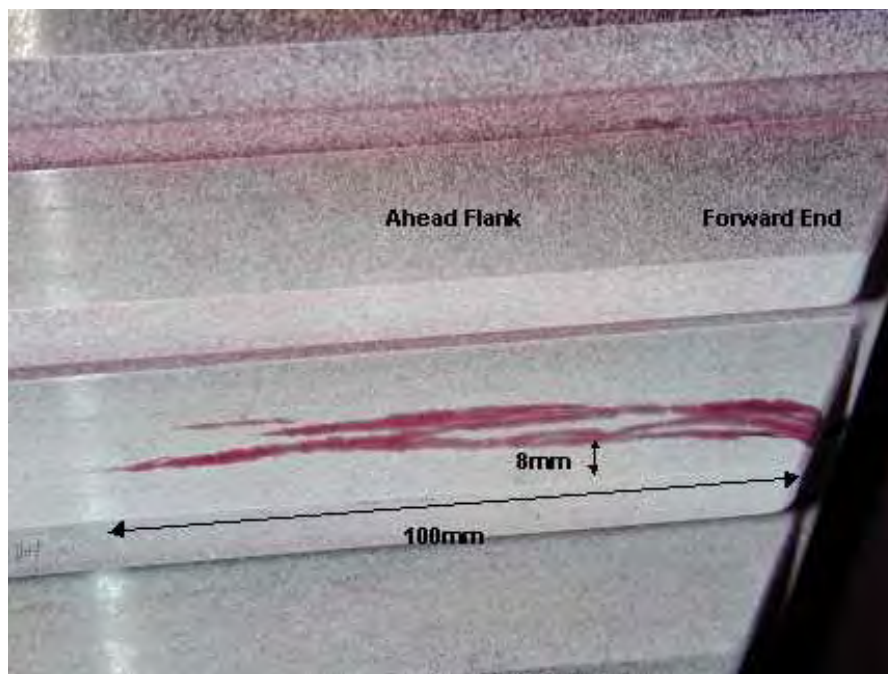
HMS LANCASTER MAINWHEEL TOOTH CRACKING
